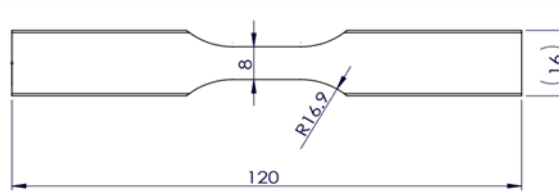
Dimensions of DIC dwell fatigue specimen (Unit: mm)
